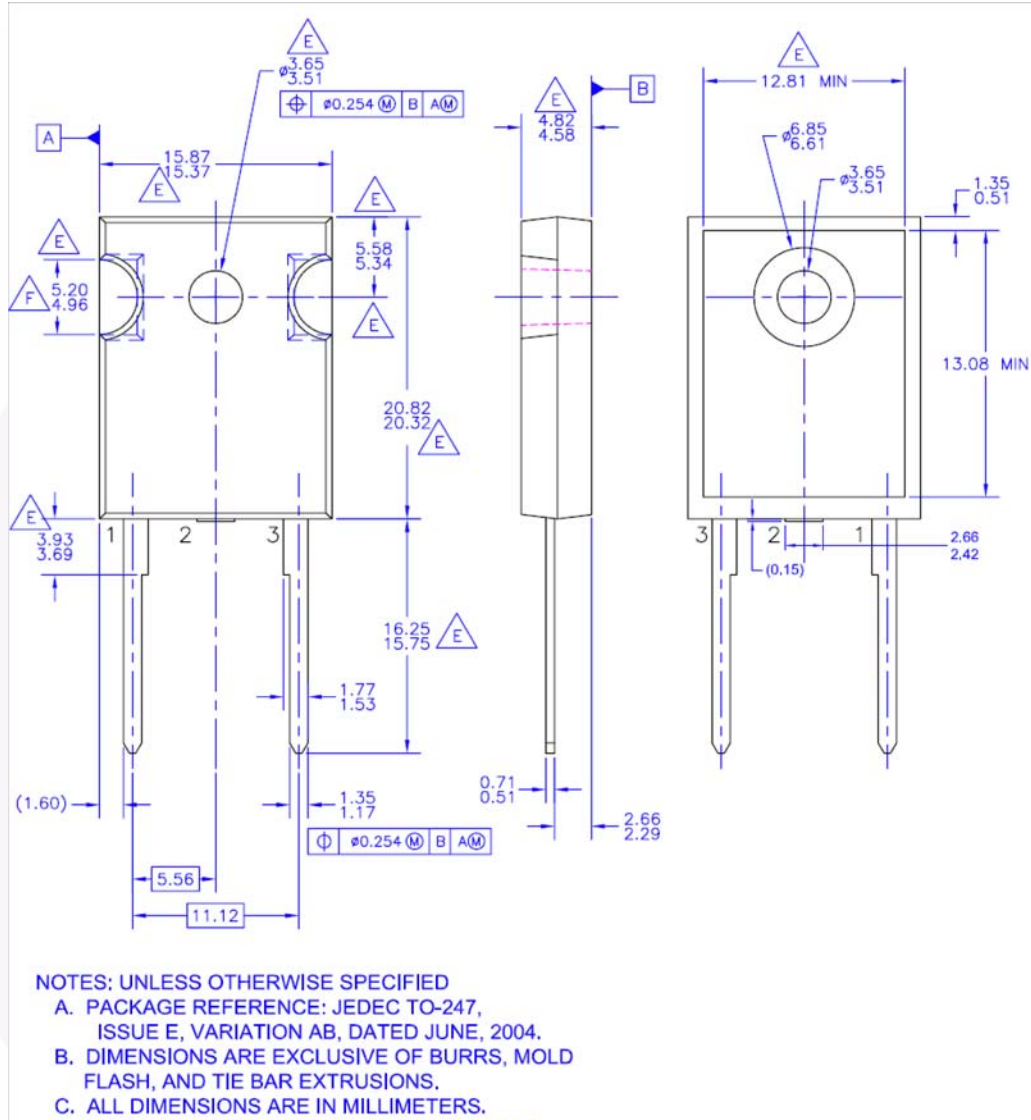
TO-247, Molded, 2LD, Jedec Option AB
